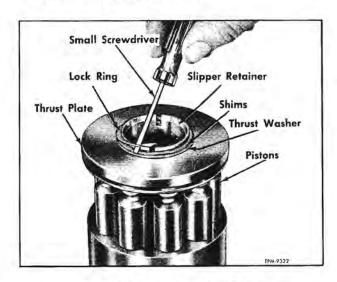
Removing Lock Ring From Pump Slipper Retainer
